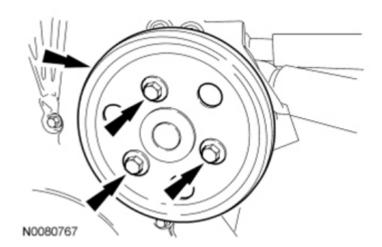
Locating Coolant Pump And Bolts Courtesy of FORD MOTOR CO.
